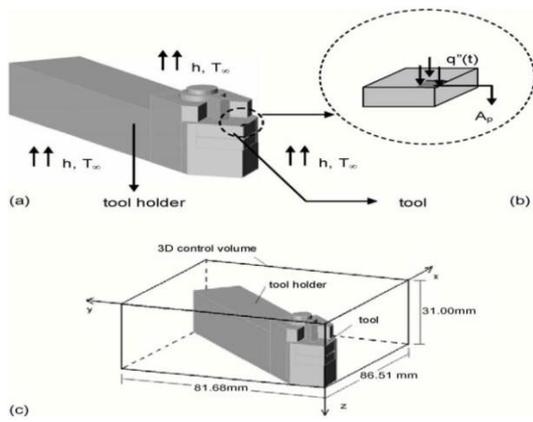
Thermal Problem Scheme (A) Tool and Tool Holder Assembly (B) Interface Heat Flux Detail (C) 3D Control Volume [7]
